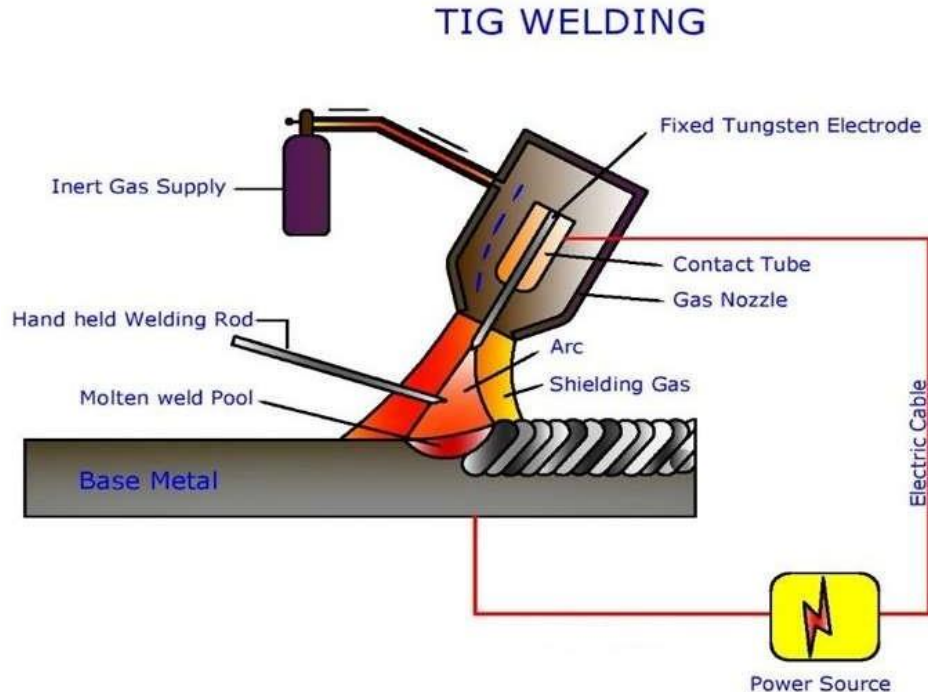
TIG Welding System Schematic Diagram.
